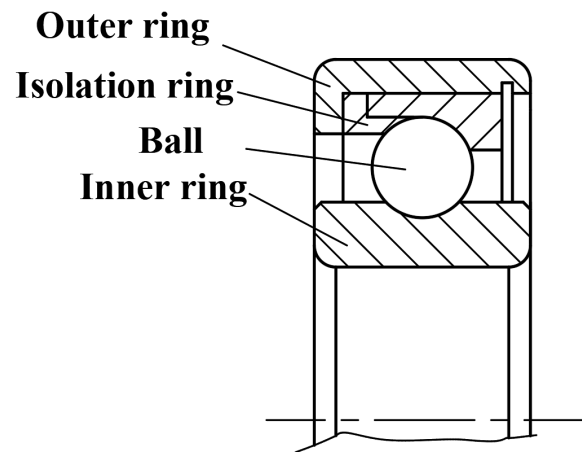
Radial-thrust single-row cageless ball bearing RU 2538903C1.
